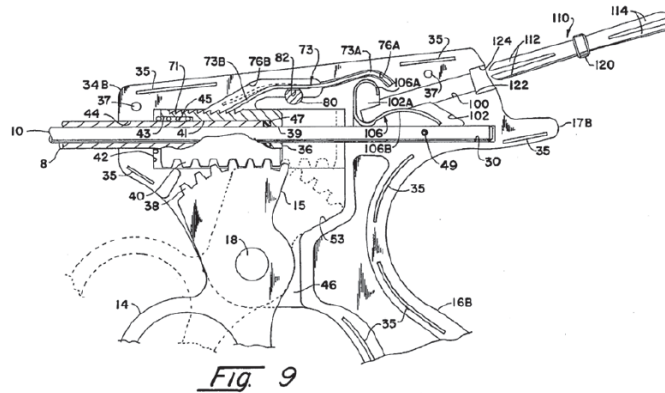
is a partially exploded view showing outer shaft 8, inner shaft 10, and movable handle member 14, which is rotatable about pivot pin 18. *Id.* at 4:40–43, 6:15–21. Outer shaft 8, which coaxially surrounds
